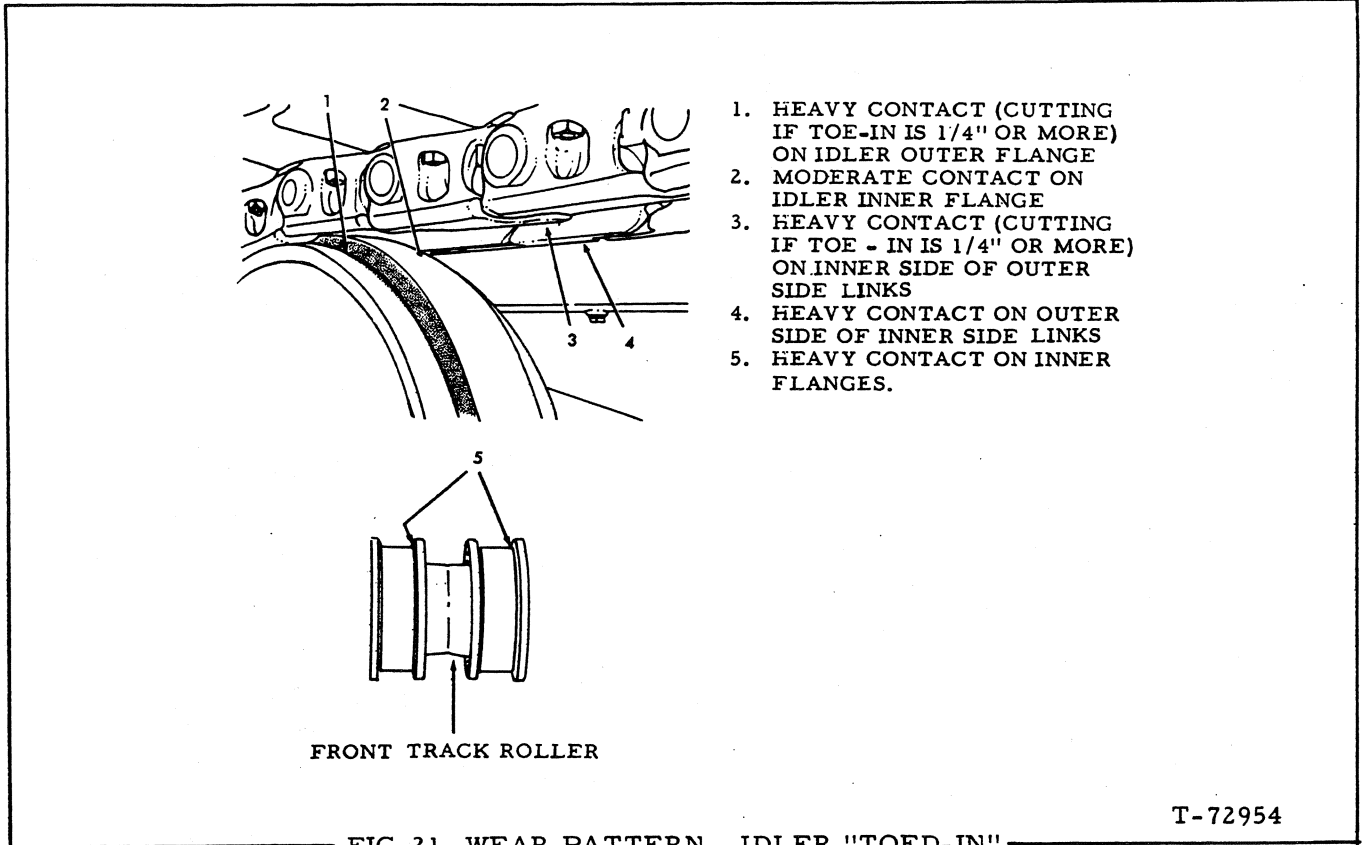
WEAR PATTERN - IDLER "TOED-IN"
